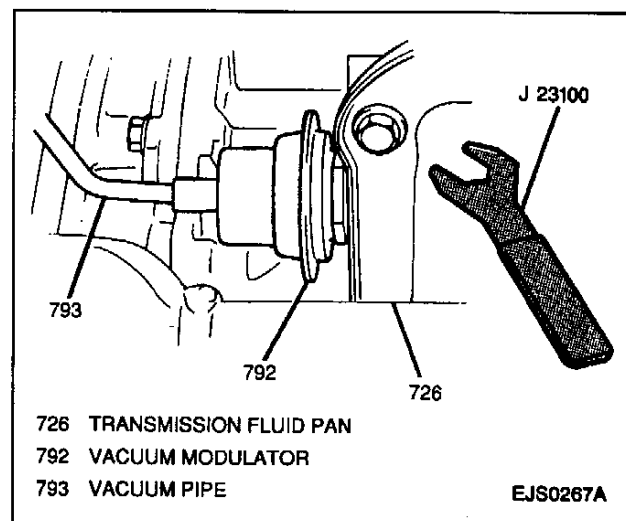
Removing Vacuum Modulator (3L30, 3-Speed)
